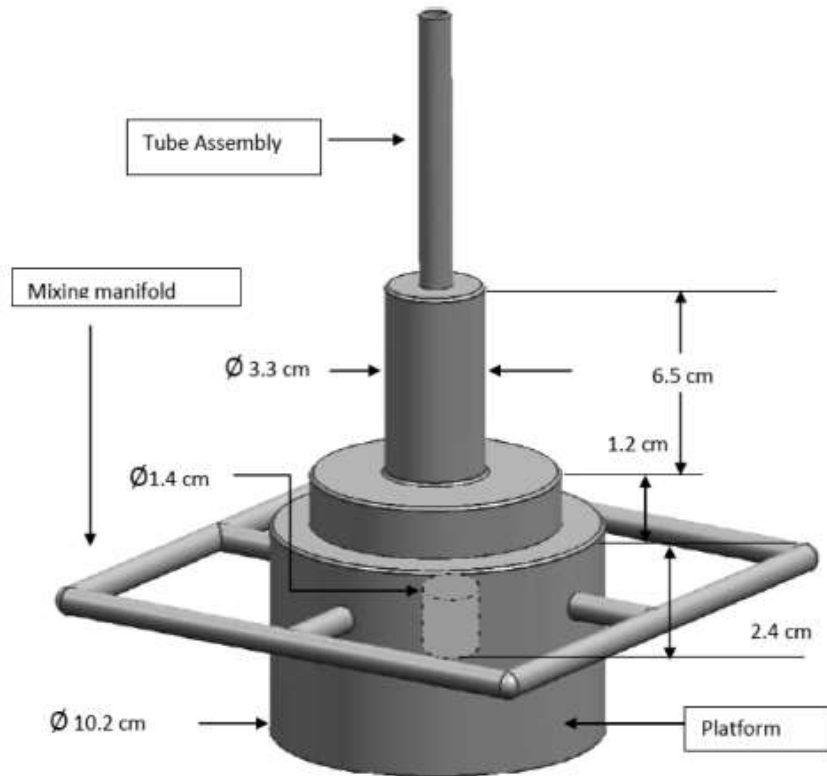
Tubular burner assembly developed to accommodate different burner diameters.
